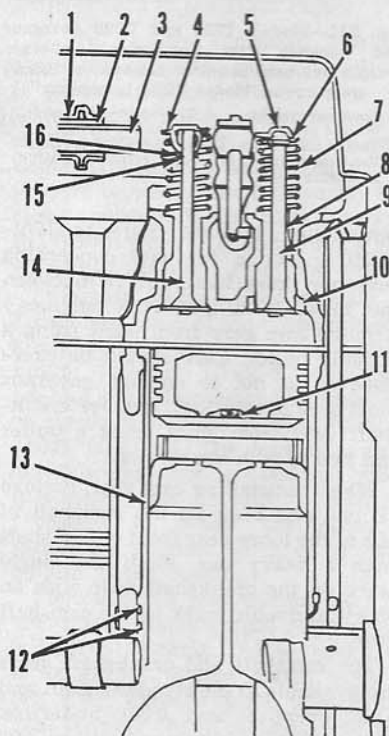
Models TE20 and TO20 engine valve arrangement. Note valve stem caps (5) which are used on both inlet and exhaust valve stems. Positive type exhaust valve rotators are supplied for service.
